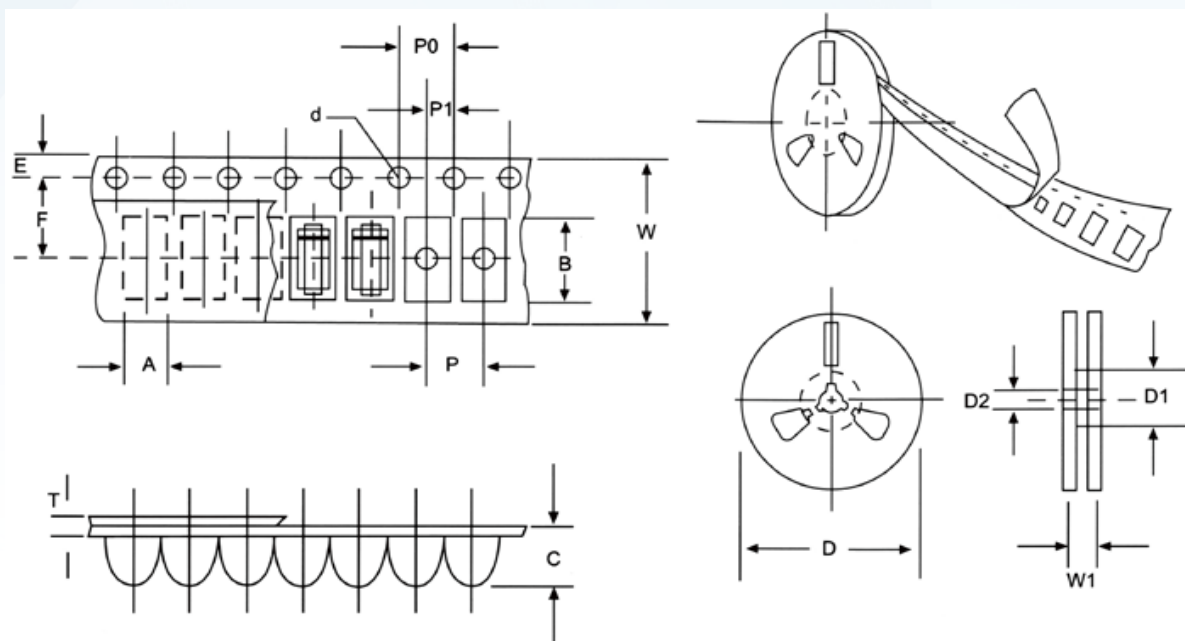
FIG:CONFIGURATION OF SURFACE MOUNTED DEVICES TAPING
